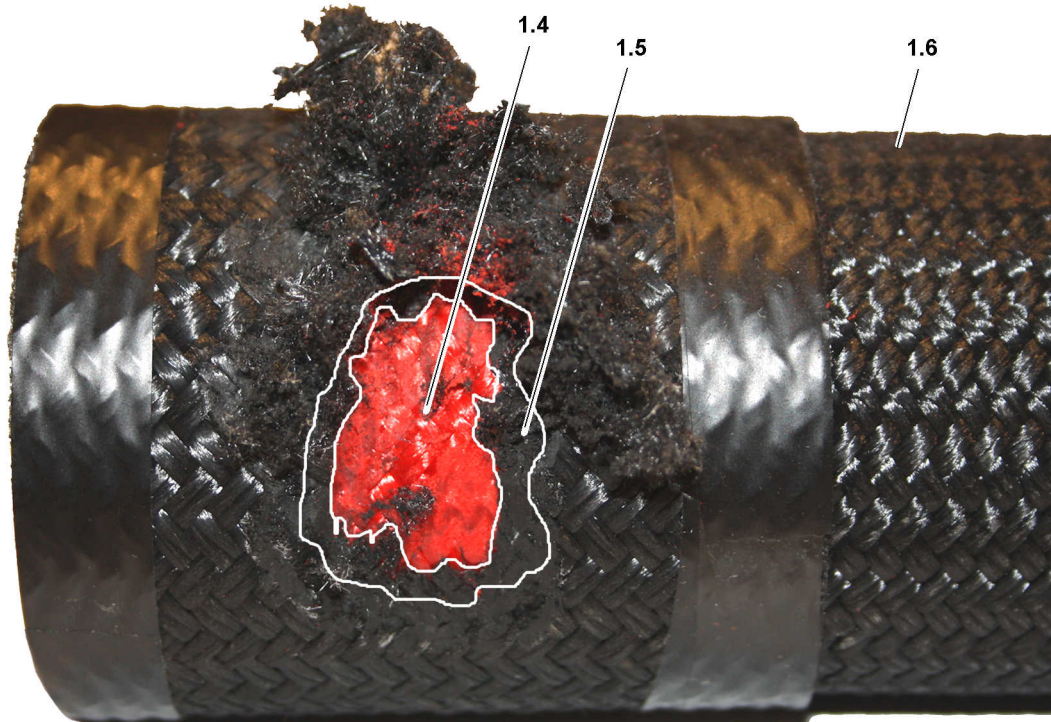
Damage of outer two rope braidings, inner braiding (red) is undamaged
